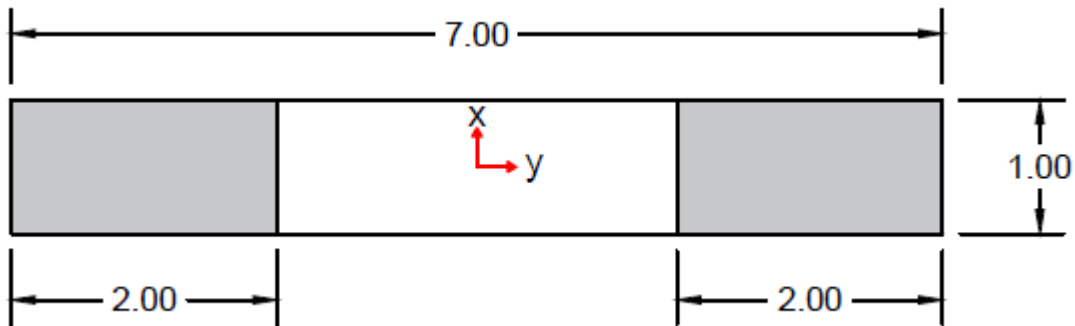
Typical specimen geometry and layout (all dimensions in inches)
